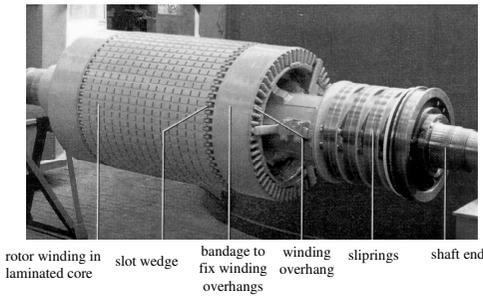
Slipring rotor: rotor winding in laminated core, right: sliprings
